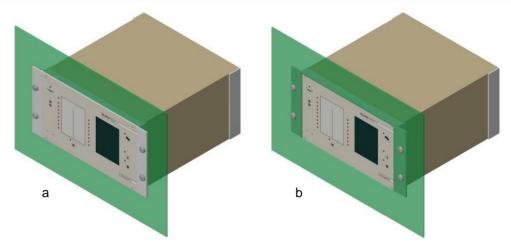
3D illustration for rack mounting of 42 HP device (a - from the front; b - from the back)
